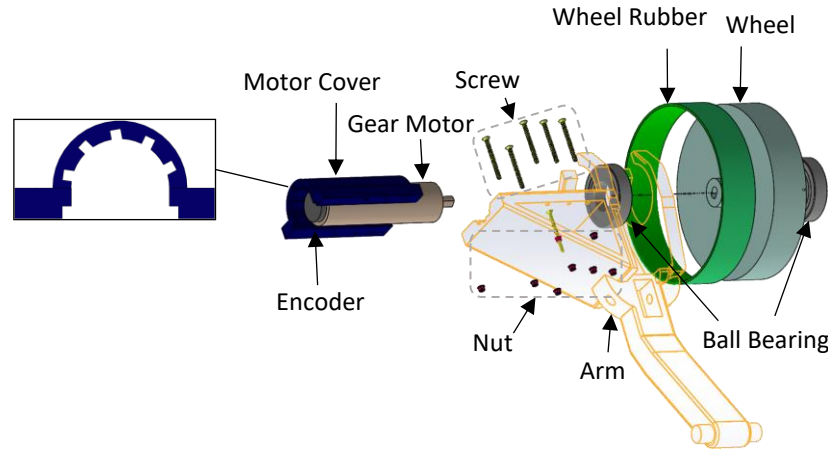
CAD Design of the Actuator Module and Its Components.
